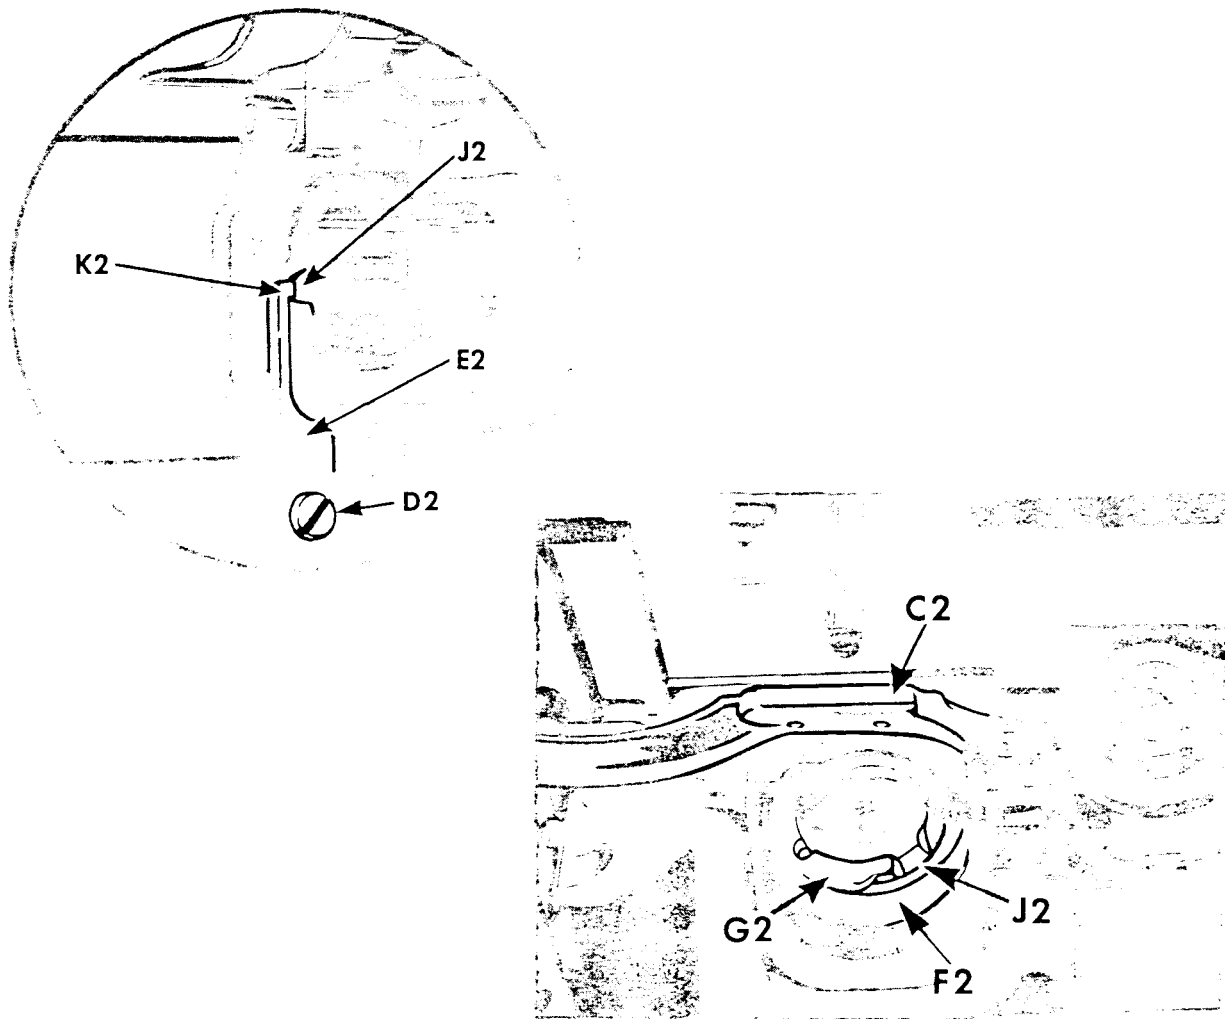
Replacing Sewing Hook (Correct Position of Thread Guard and Bobbin Case Holder)
